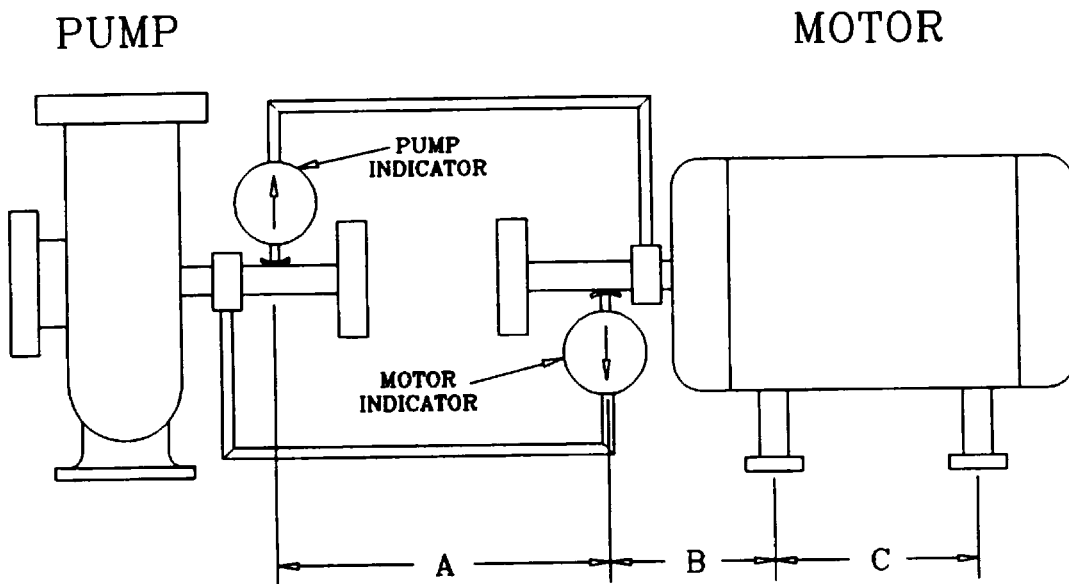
Reverse indicator alignment worksheet (showing readings added).
